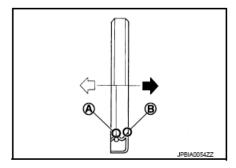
Identifying Oil Seal Lip And Dust Seal Lip Courtesy of NISSAN NORTH AMERICA, INC.
